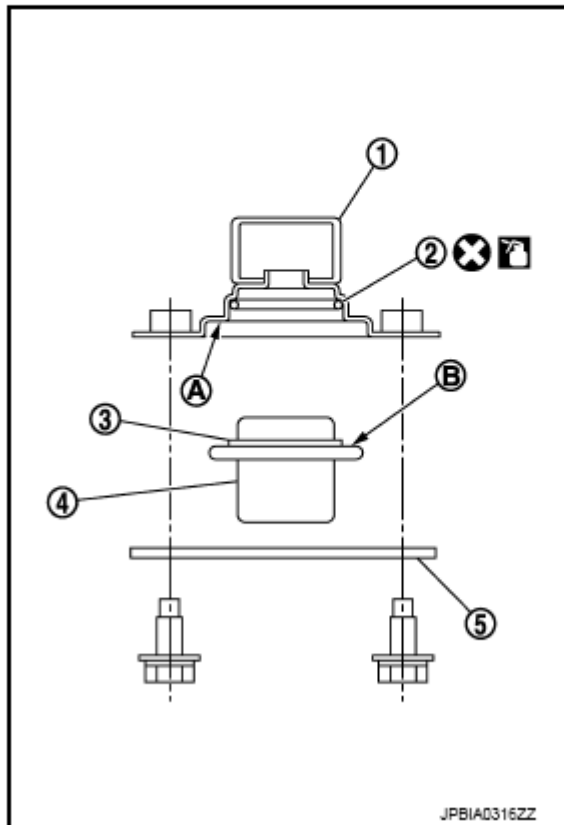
Identifying Fuel Tube, Fuel Damper, Cap And Spacer
